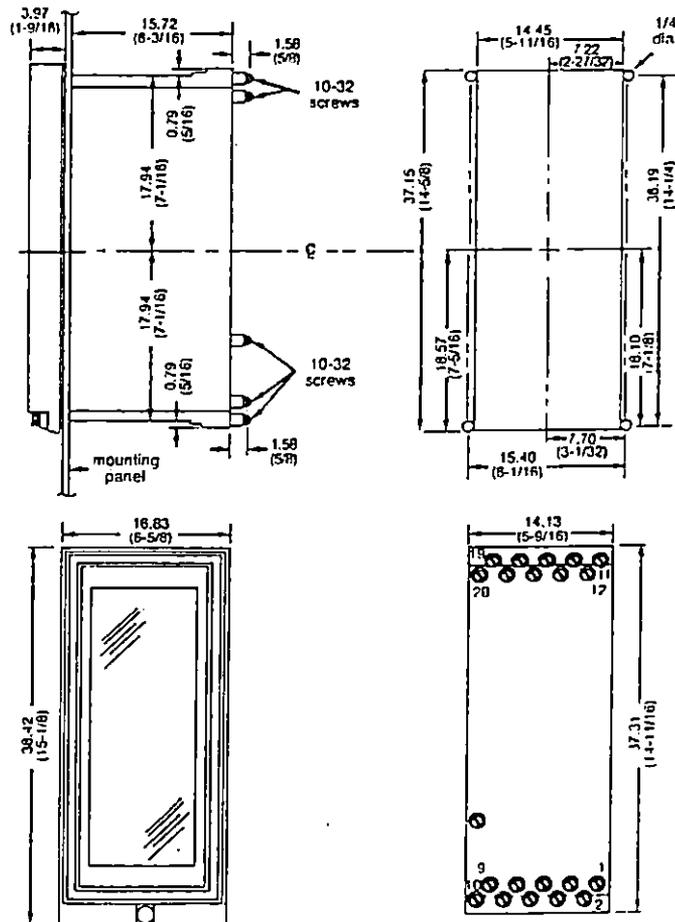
Q111/Q210/Q310 Meter Dimensions (Socket Base)
